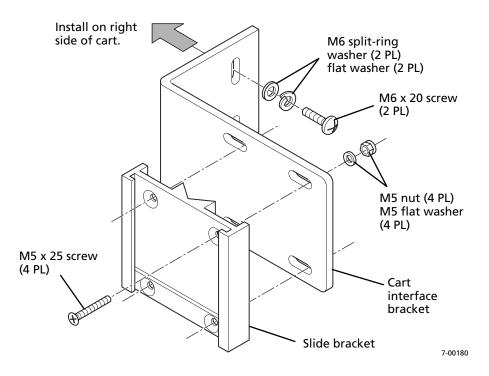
Removing Hudson RCI™* humidifier bracket assembly
